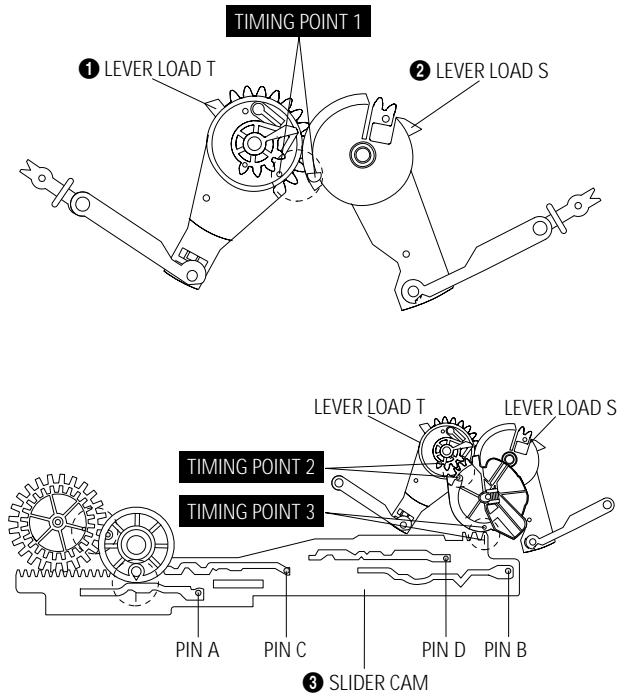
Gear Loading Drive, Slider Cam, Lever Load S, T Ass'y Assembly
